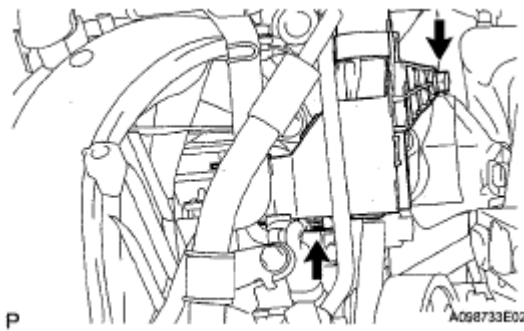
Identifying Wire Harness Protector Clamp And Bolt
